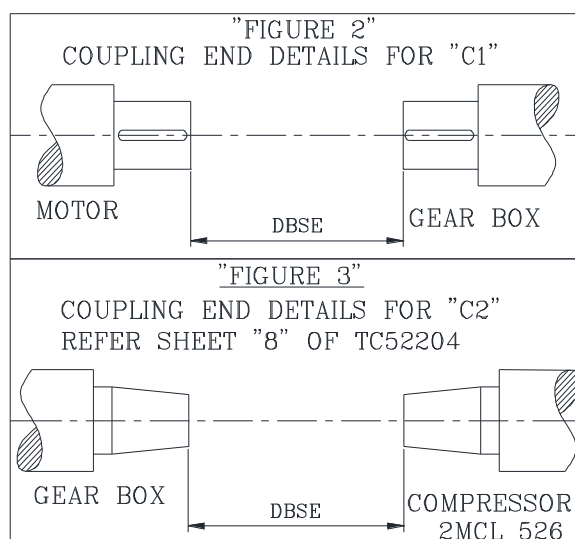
FIGURE-II: END DETAILS (See TC 52204 for mounting details for C2 Coupling)
